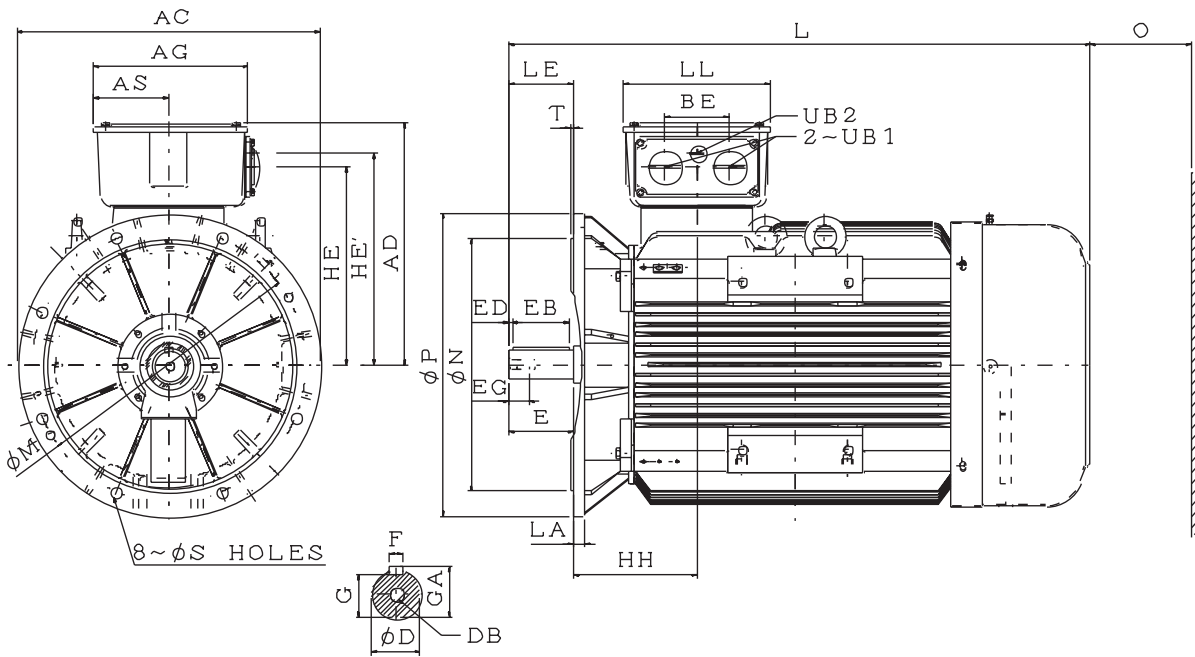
Outline drawing of cast iron design, feet version, mounting B5; frame size 315SA - 315MC
